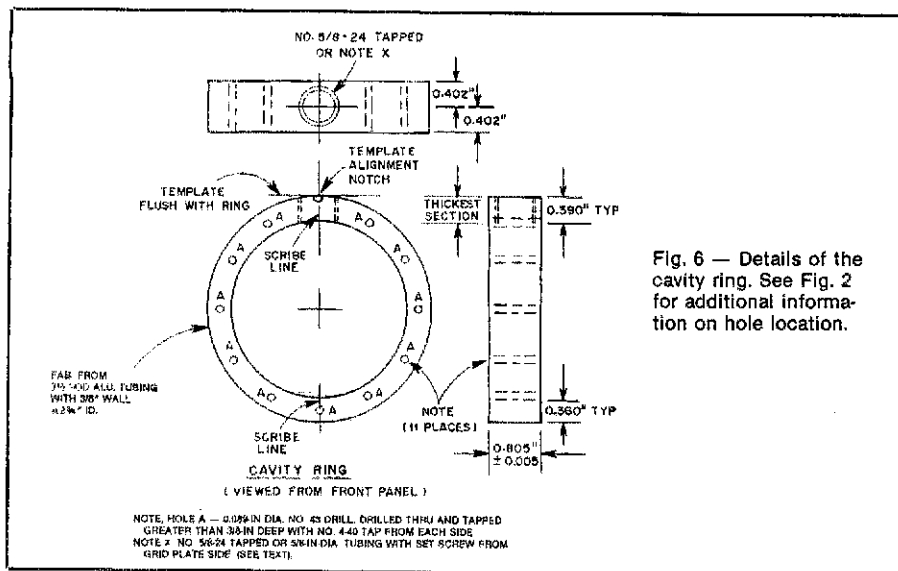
Details of the cavity ring. See Fig. 2 for additional information on hole location.
